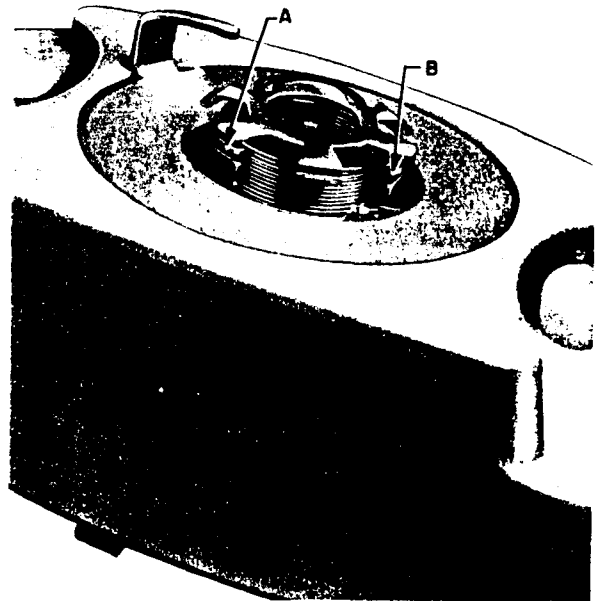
8-Type Dial, Rear View, Showing Openings at A and B for Removal of Lock Ring
